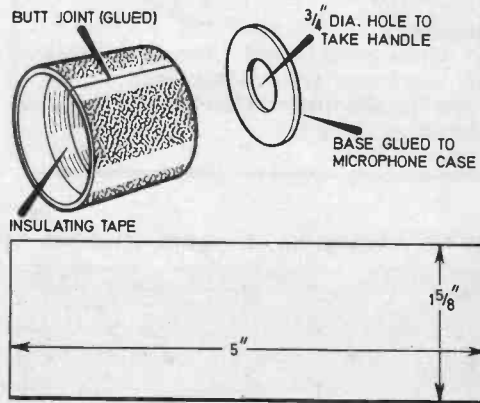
(above) The cylindrical microphone head with "unrolled" dimensions.
